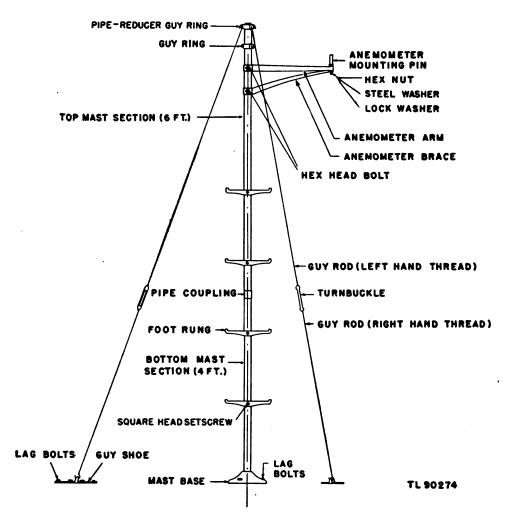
Support ML-29-B or ML-29-E, outline drawing.
